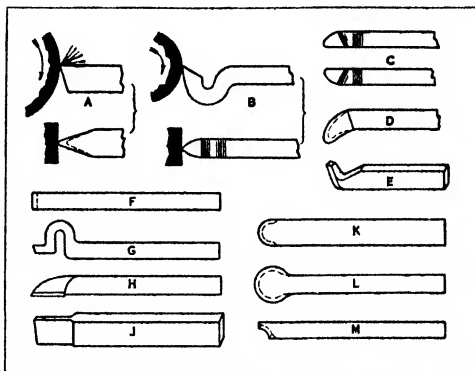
METAL-TURNING TOOLS (A) FOR SCRAPING BRASS, (B) FOR TURNING METALS, (C) RIGHT- AND LEFT-HAND TOOLS; (D) BETTER FORM OF SAME, (E) DIAMOND OR ANGULAR-EDGE, FOR CUTTING; (F) FINISHING TOOL; (G) SPRING FINISHING TOOL; (H) SIDE OR KNIFE TOOL; (I) PARTING OR CUTTING-OFF TOOL. (K, L) ROUND NOSE TOOLS. (M) RADIUS
